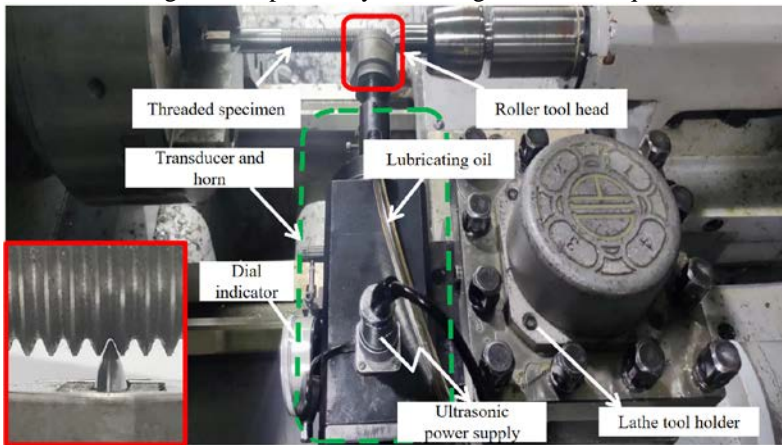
Ultrasonic rolling test equipment for thread roots.
